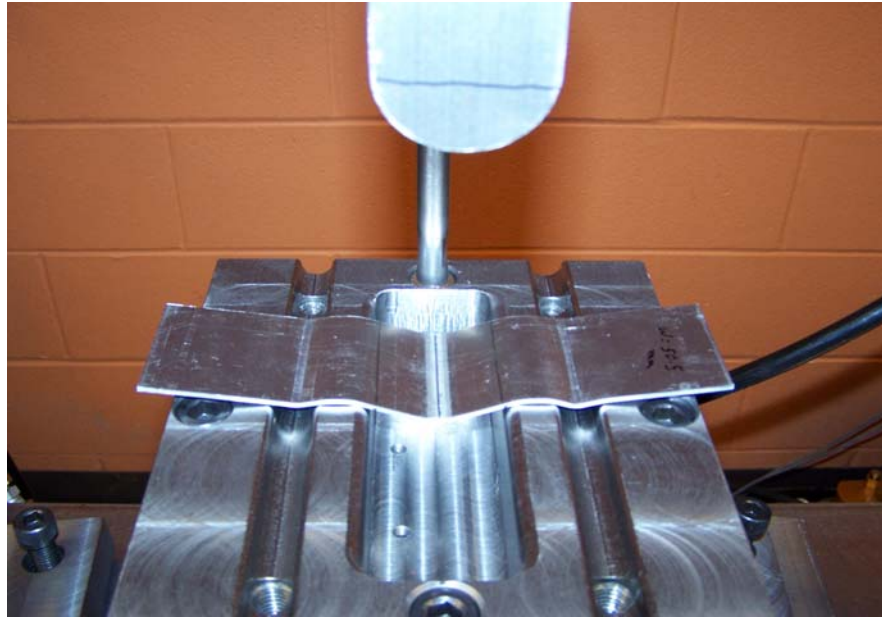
Welded blank at the end of stretch forming process
